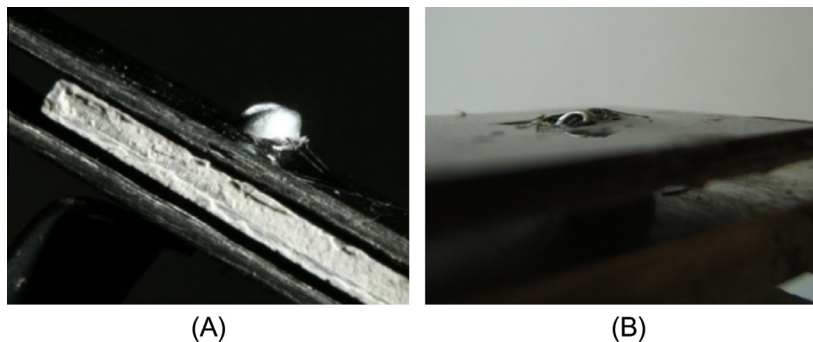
(A) Damaged surface of the hybrid joint with steel rivets and (B) damage of the CFRP near the hole after the pull-out of the rivet.
